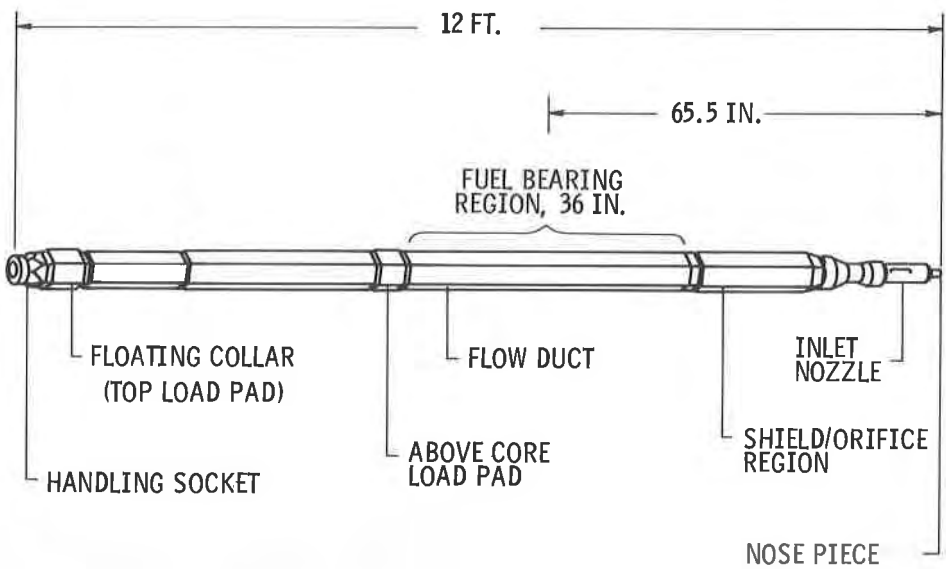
Standard FTR fuel driver assembly (MARK-IA)
